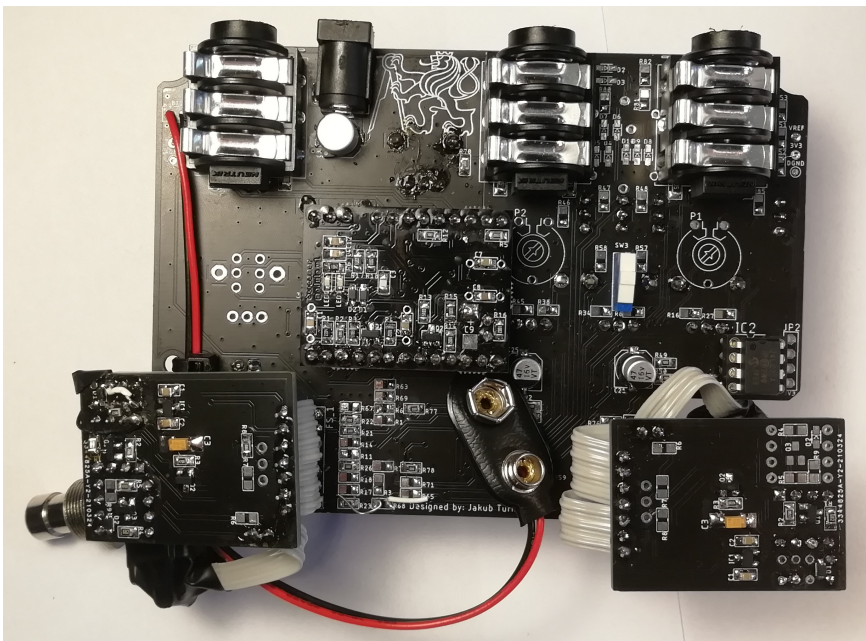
Bottom view of the fully assembled digital guitar pedal with controlled bypass switching.
